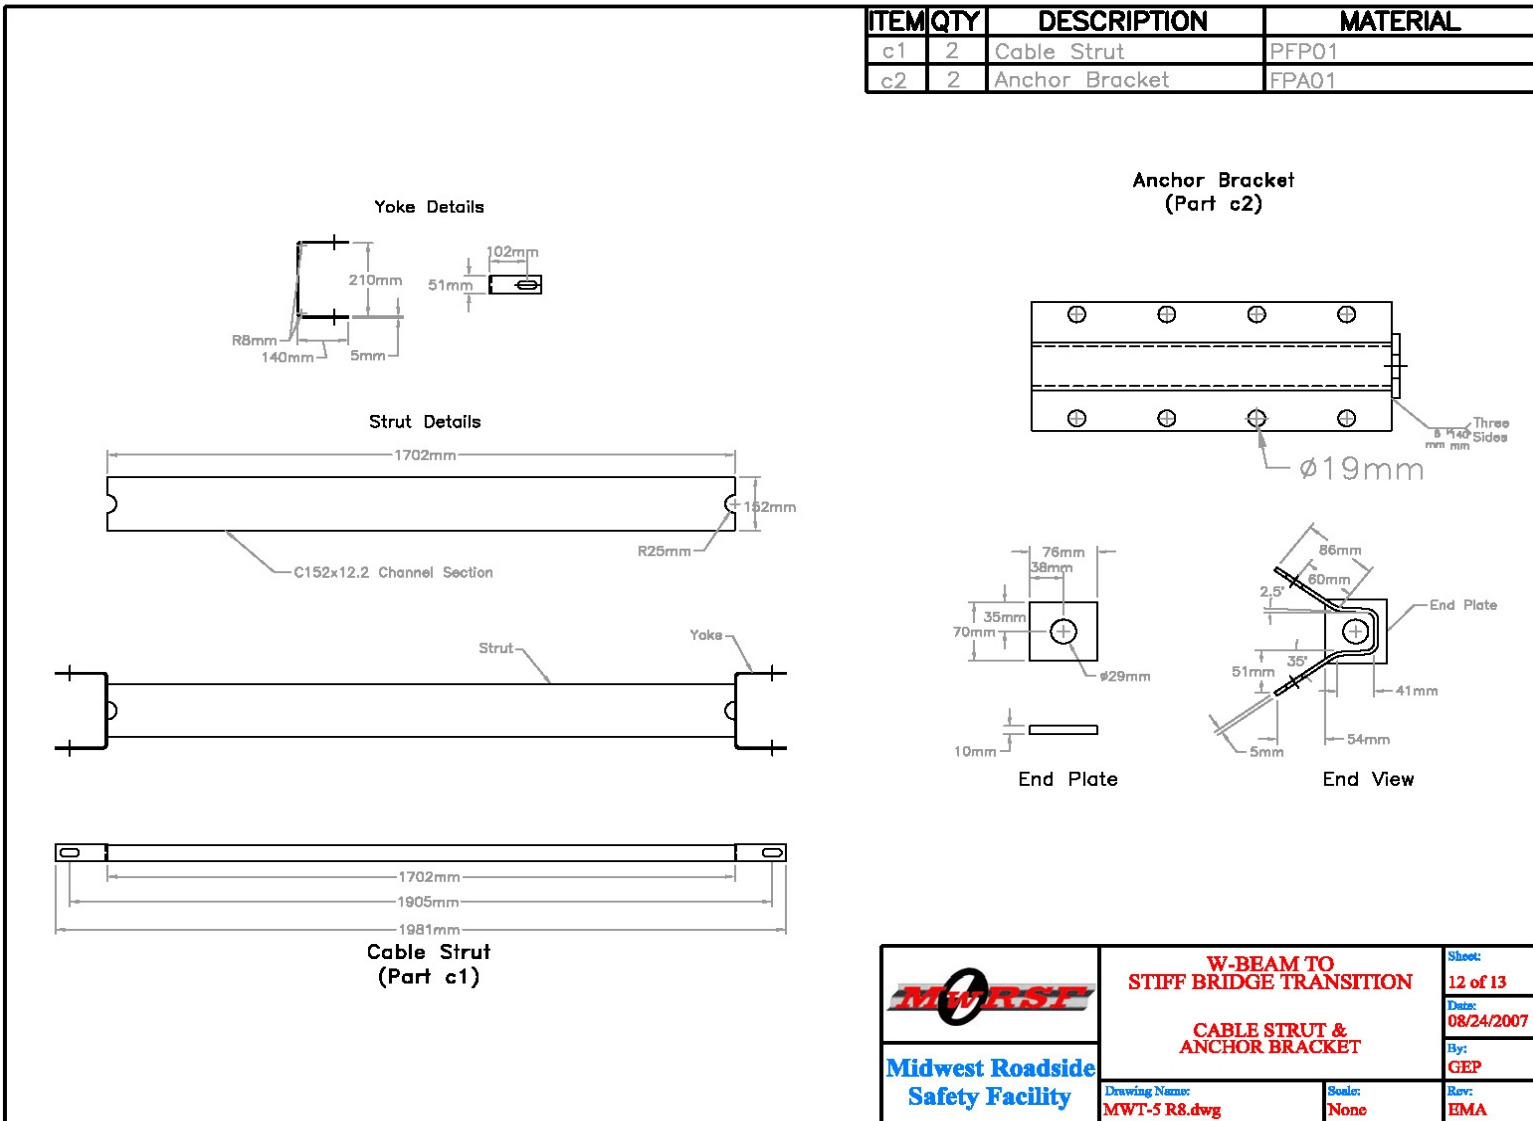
Cable Strut and Anchor Bracket Details (Design No. 3)
